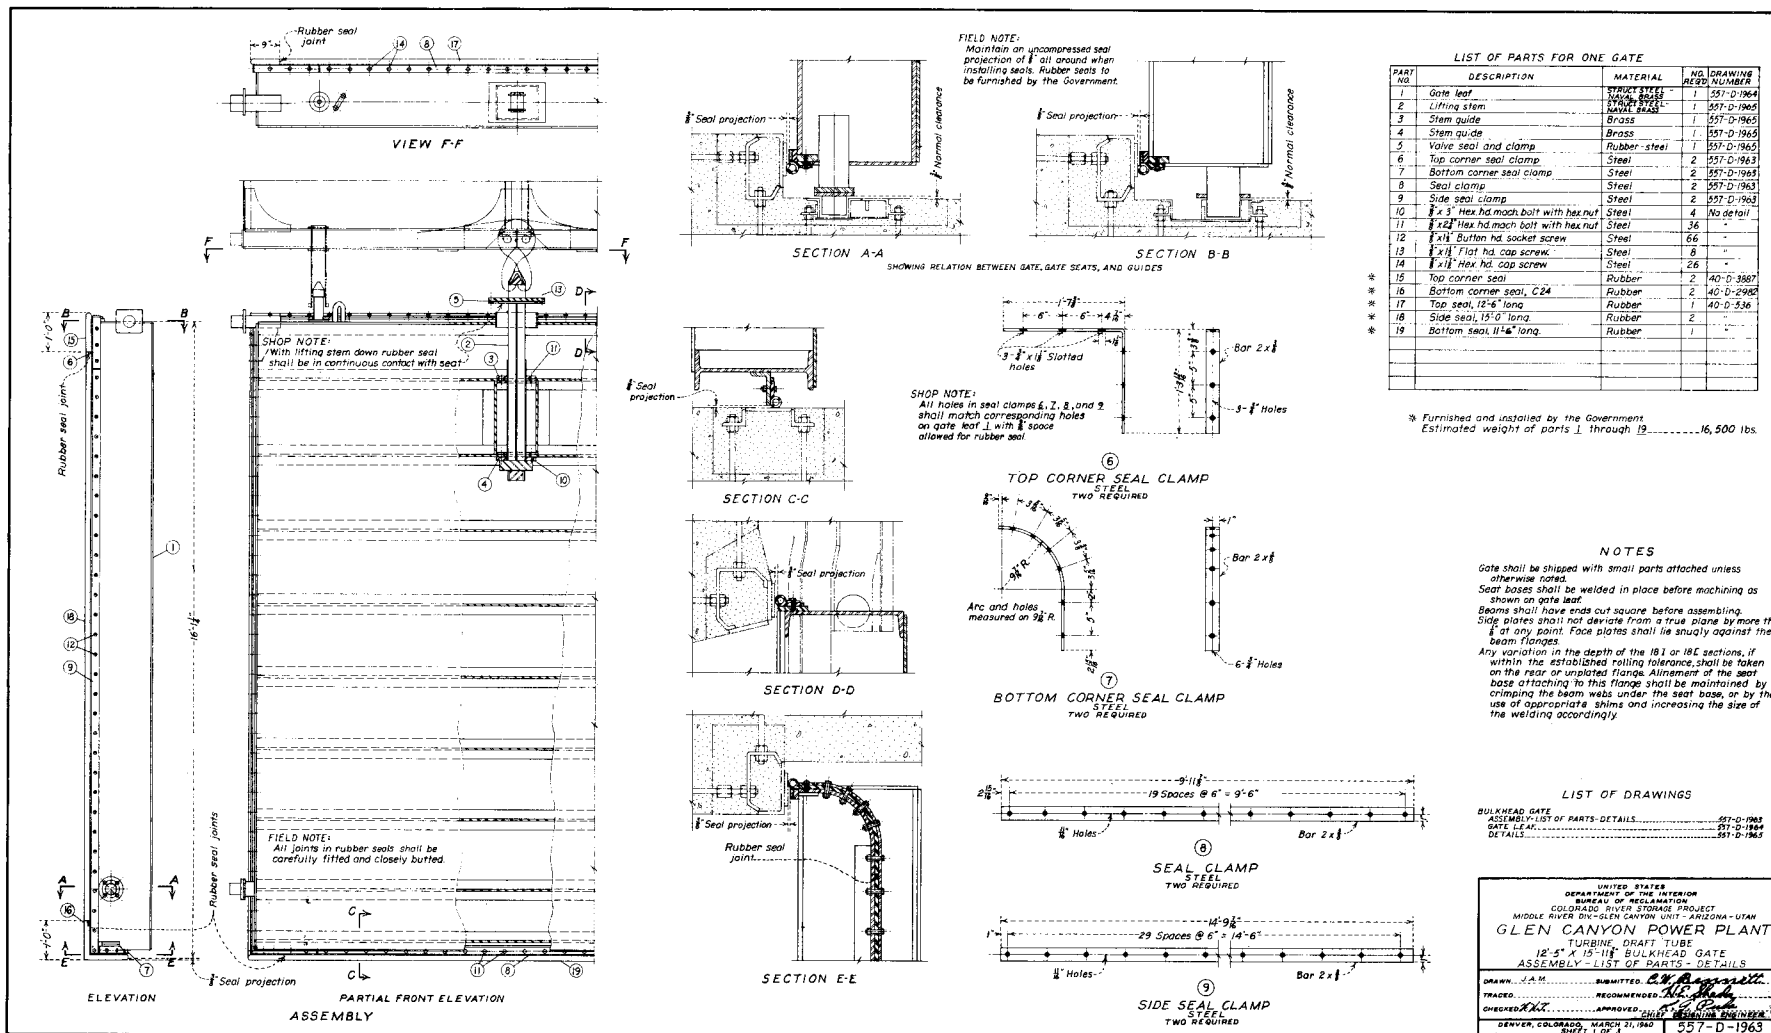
Turbine draft tube 12.42- by 15.95-foot bulkhead gate assembly.
